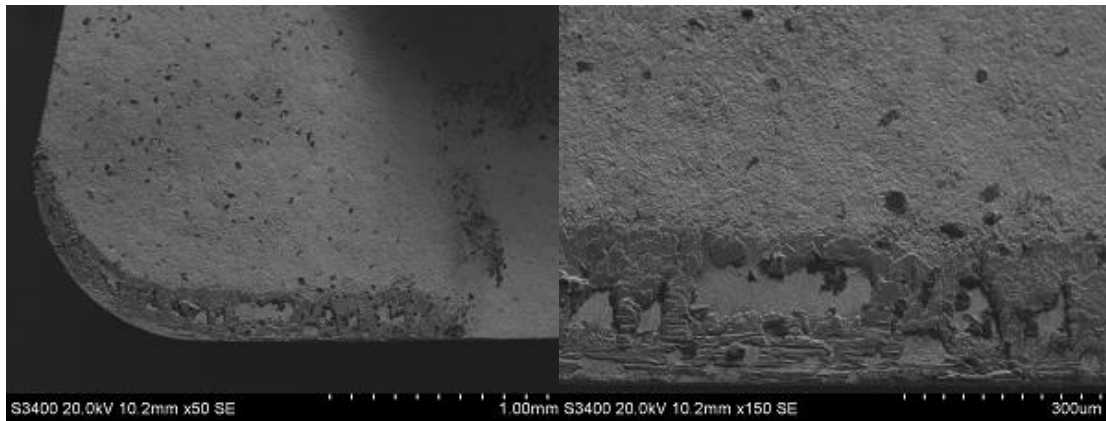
SEM images of cutting tool when cutting speed is 60m/min and feed rate is 0.15 mm/rev (left) and amplified part (right) after machining 20 cm<sup>3</sup>
